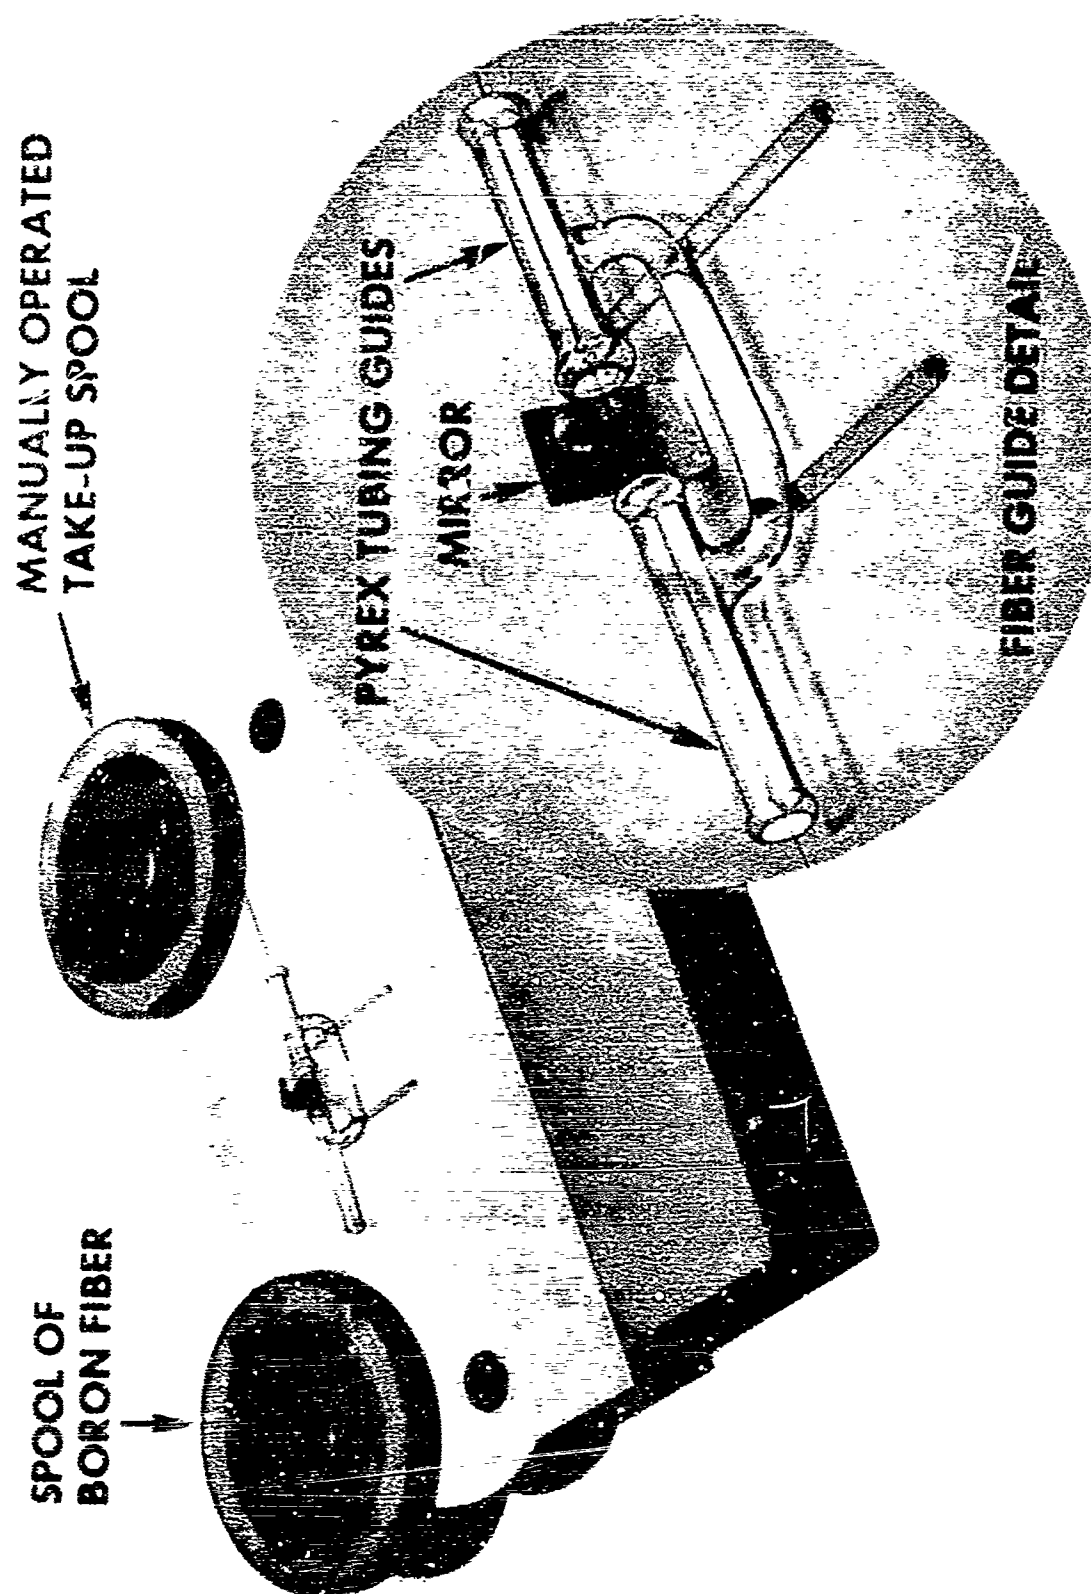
Inspection System Fiber-feed Alignment Fixture
